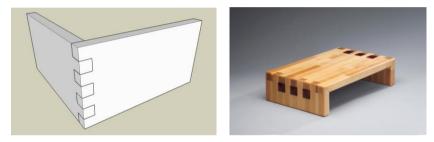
The structure of finger joint technique and the finished Tea-table Design which applies the finger joints.
